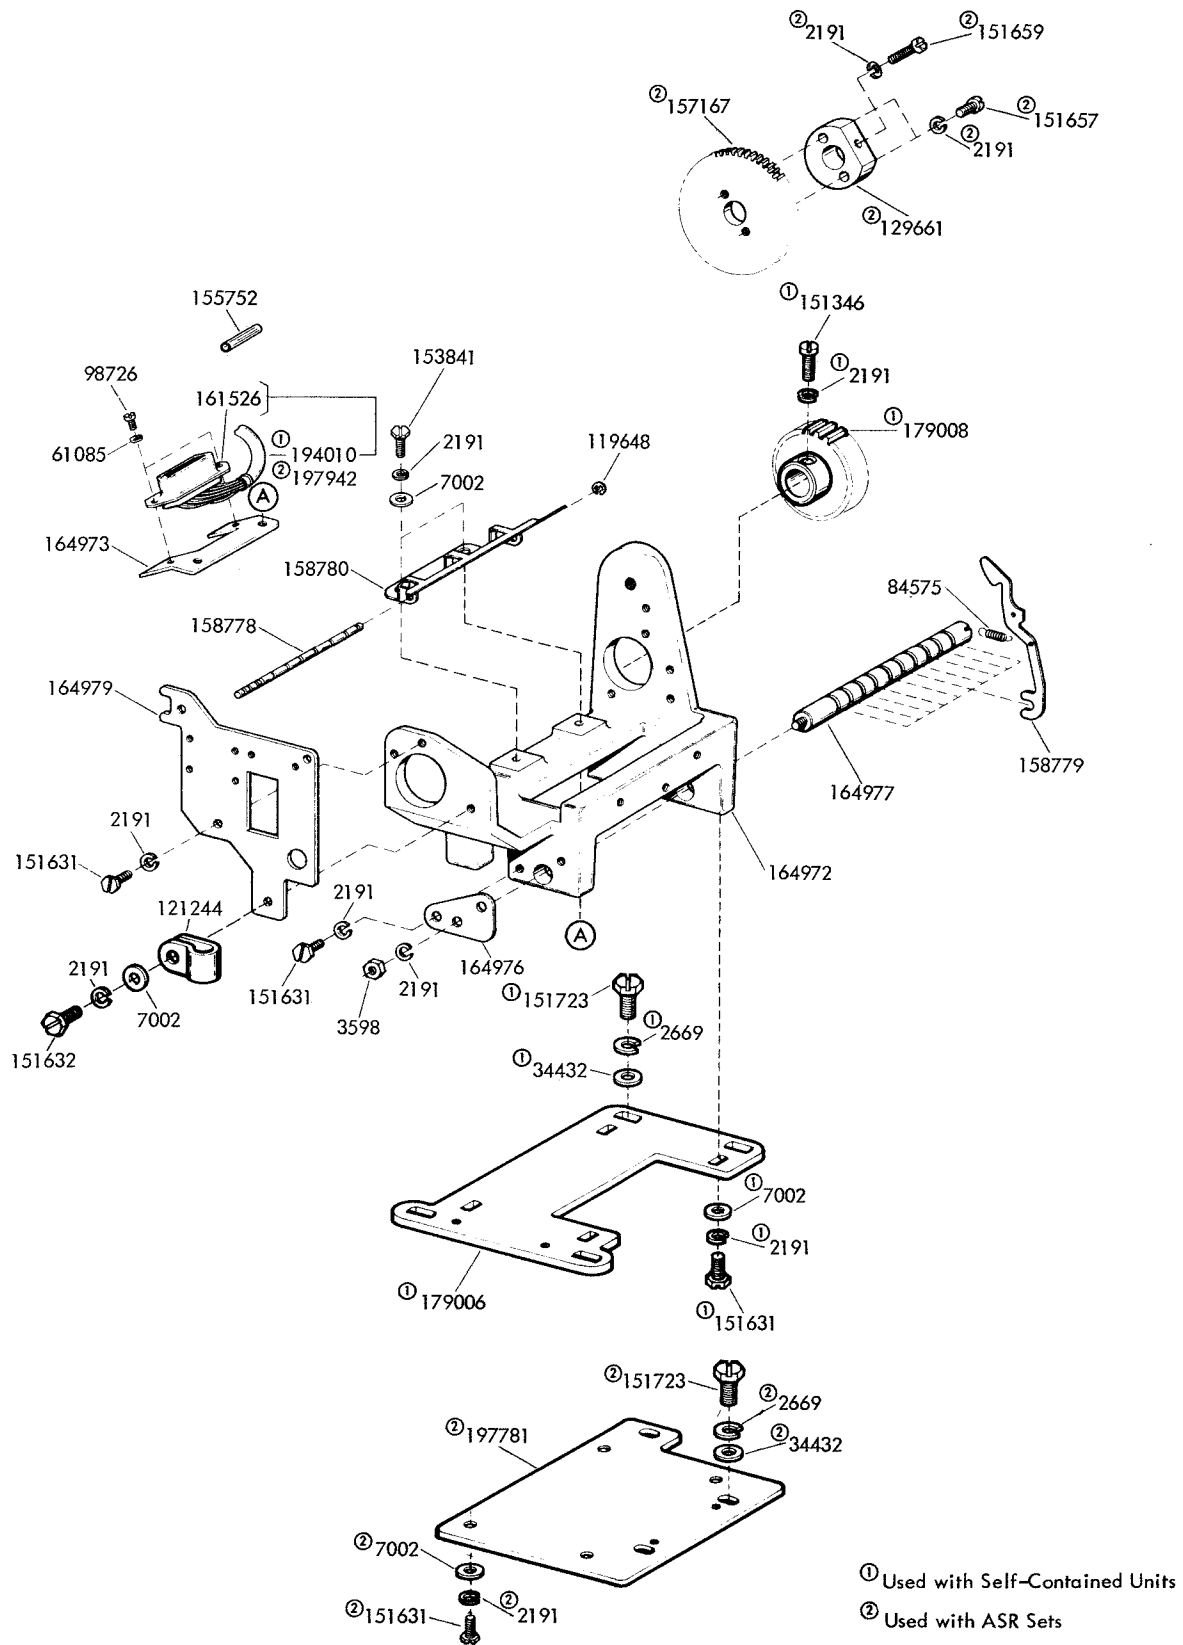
FRAME MECHANISM (SELF-CONTAINED & ASR)
